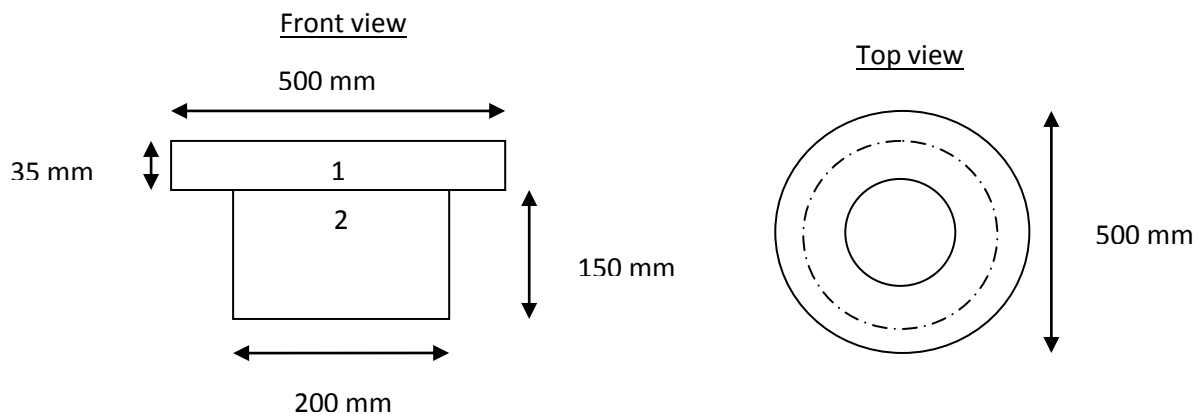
Stripped platen mould adjuster mounted on the prismatic container
